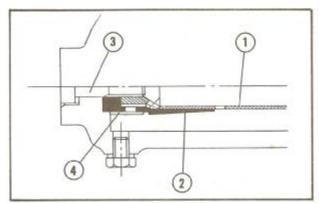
(1) Fork piston (2) Oil lock piece
